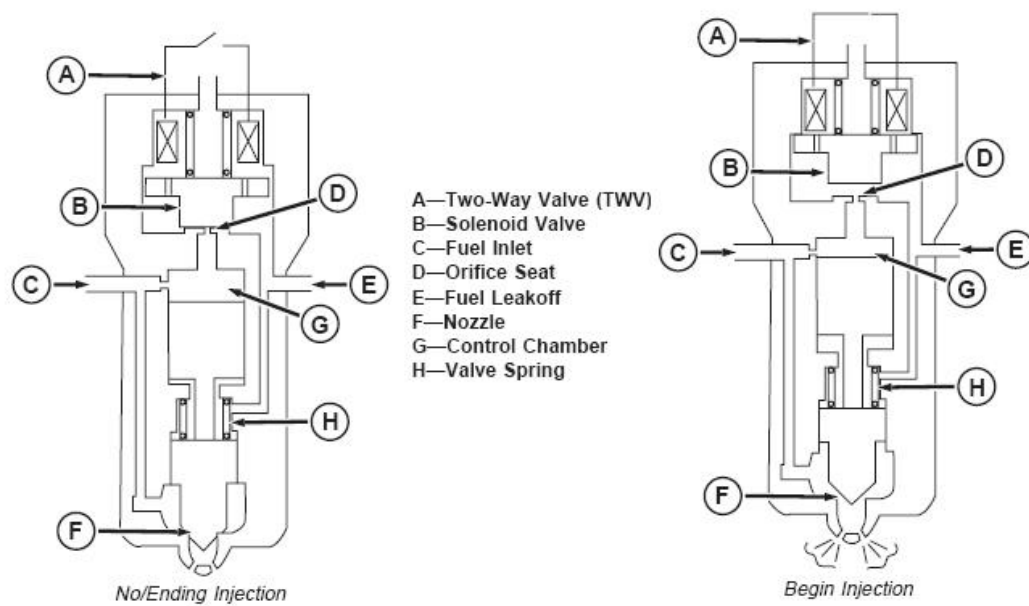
Cross-sectional drawing of typical injector used in John Deere 4045 Diesel Engine for (left) non-injecting and (right) injecting actions [12].
